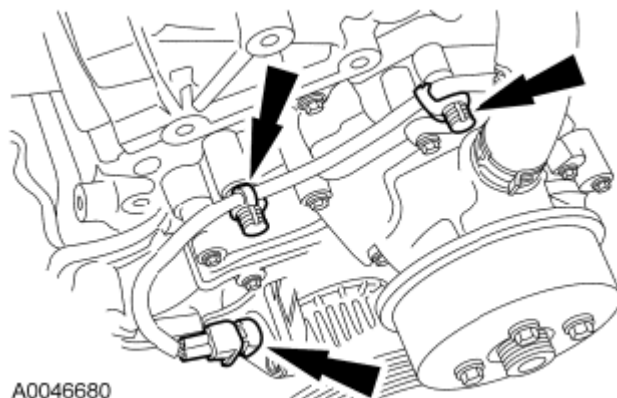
Locating Crankshaft Position Sensor Electrical Connectors And Wiring Anchors
